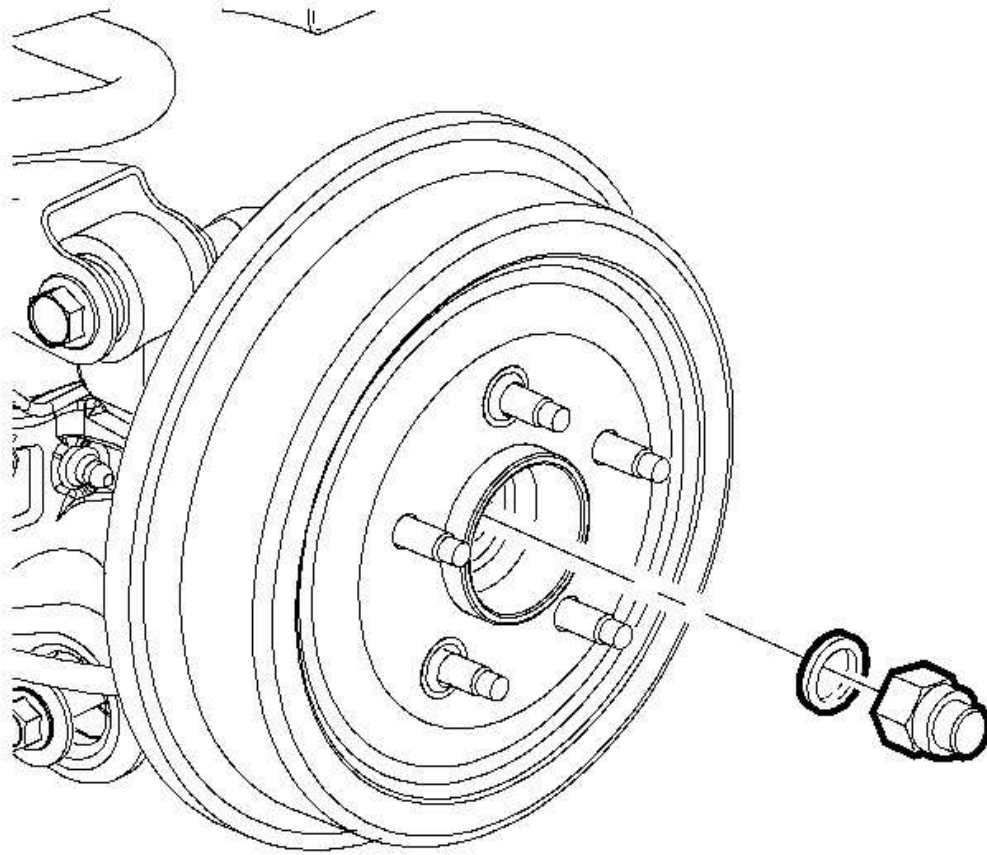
View Of Wheel Bearing/Hub & Mounting Bolts
